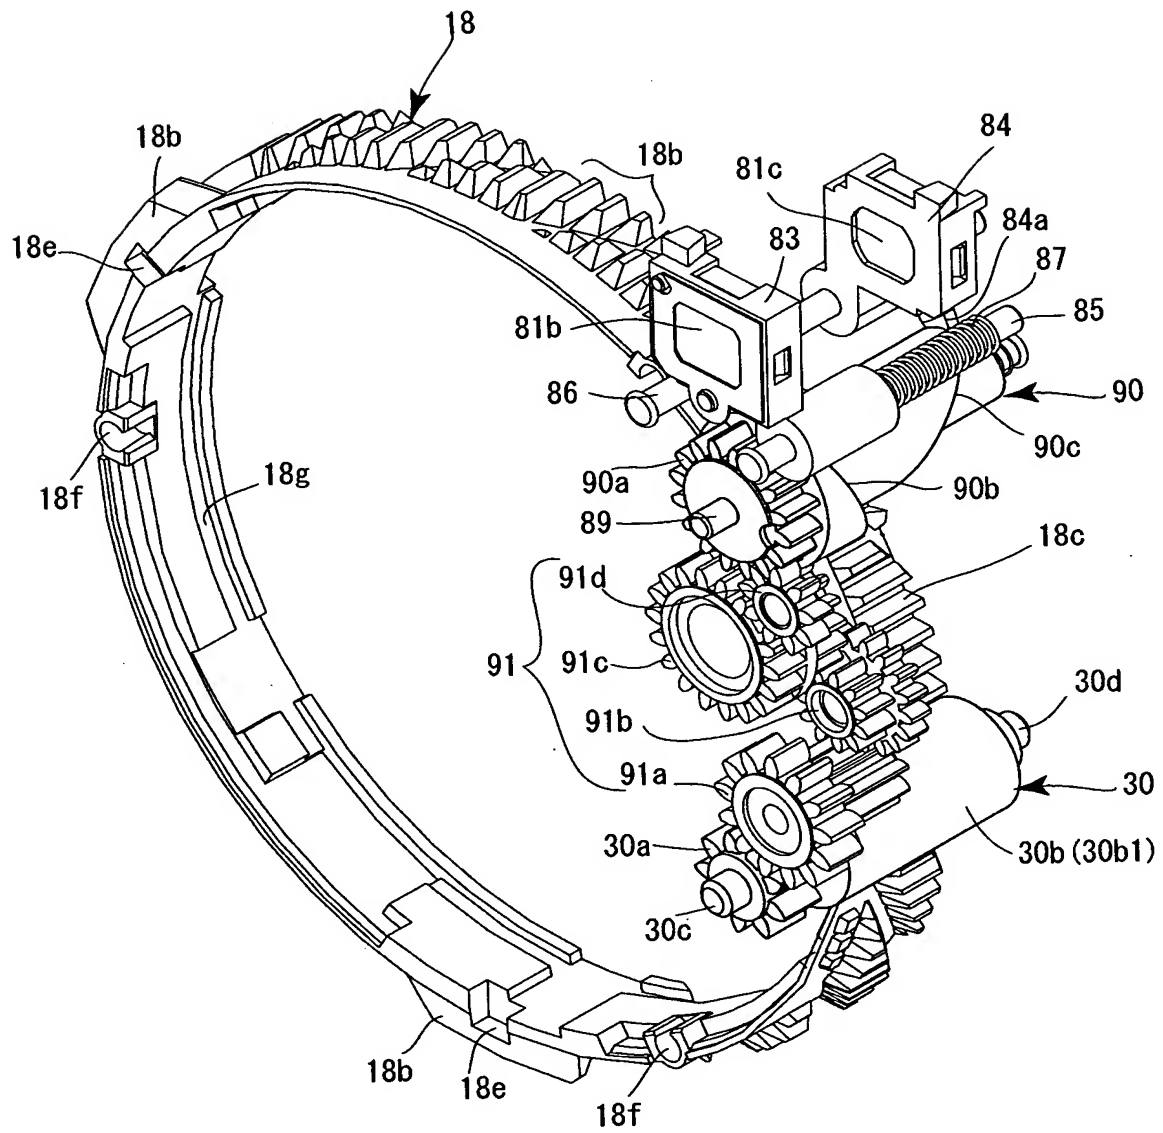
is a schematic diagram of a circular gear assembly 18. The assembly includes a large outer gear ring 18b with internal teeth 18c(18b). A series of smaller gears 91 are arranged in a row along the right side of the ring. These gears include 90a, 90, 91d, 91c, 91b, and 91a. A central gear 30 is also shown, with components 30a, 30b, and 30c. Other labels include 83, 84, 85, 86, 89, 18e, 18f, and 18g.
